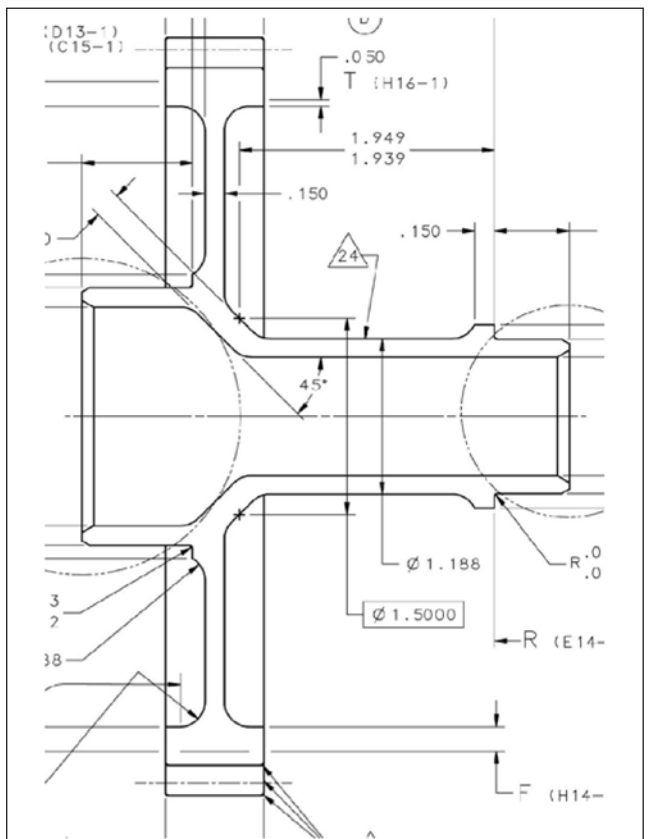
Honing test gear: 56-tooth, 6-DP, 25° nominal pressure angle spur gear.
